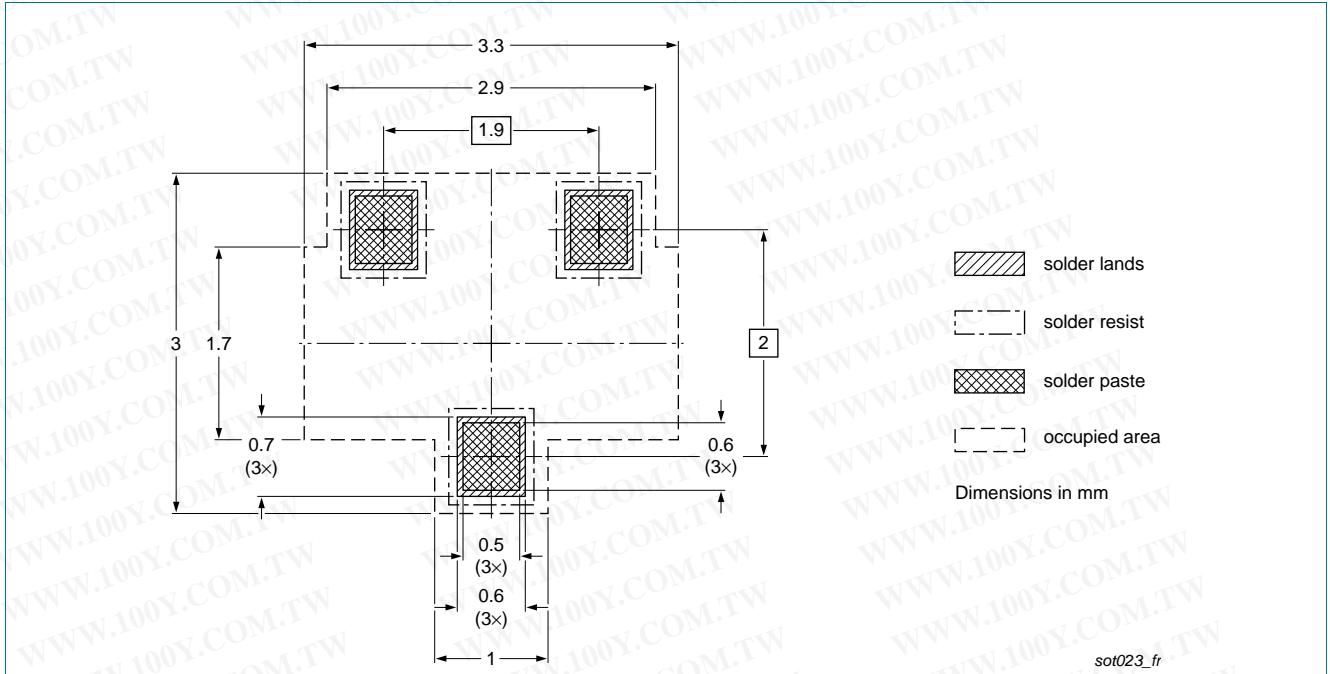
Reflow soldering footprint for SOT23 (TO-236AB)
